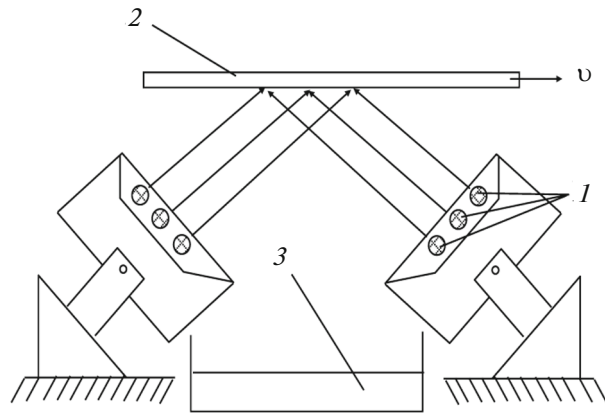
Board drying with IR heating: (1) IR emitters, (2) board, and (3) flux collector.
